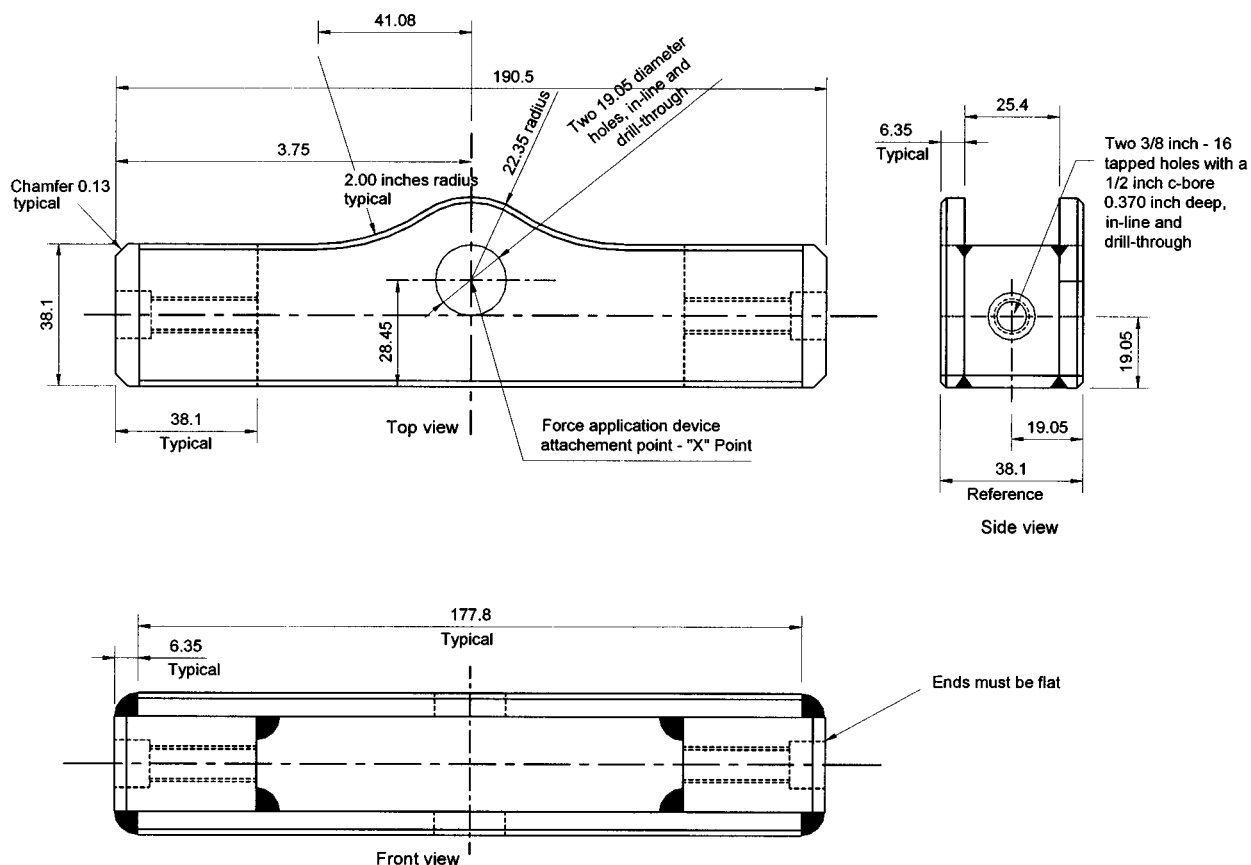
Plan View, Static Force Application Test Device 1 (SFAD 1)
